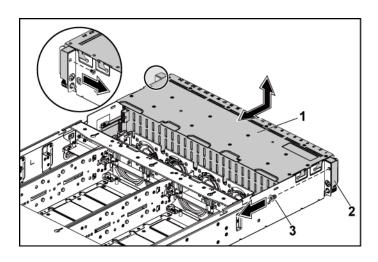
Removing and Installing the 2.5" Hard-Drive Backplane for Expander Configuration
